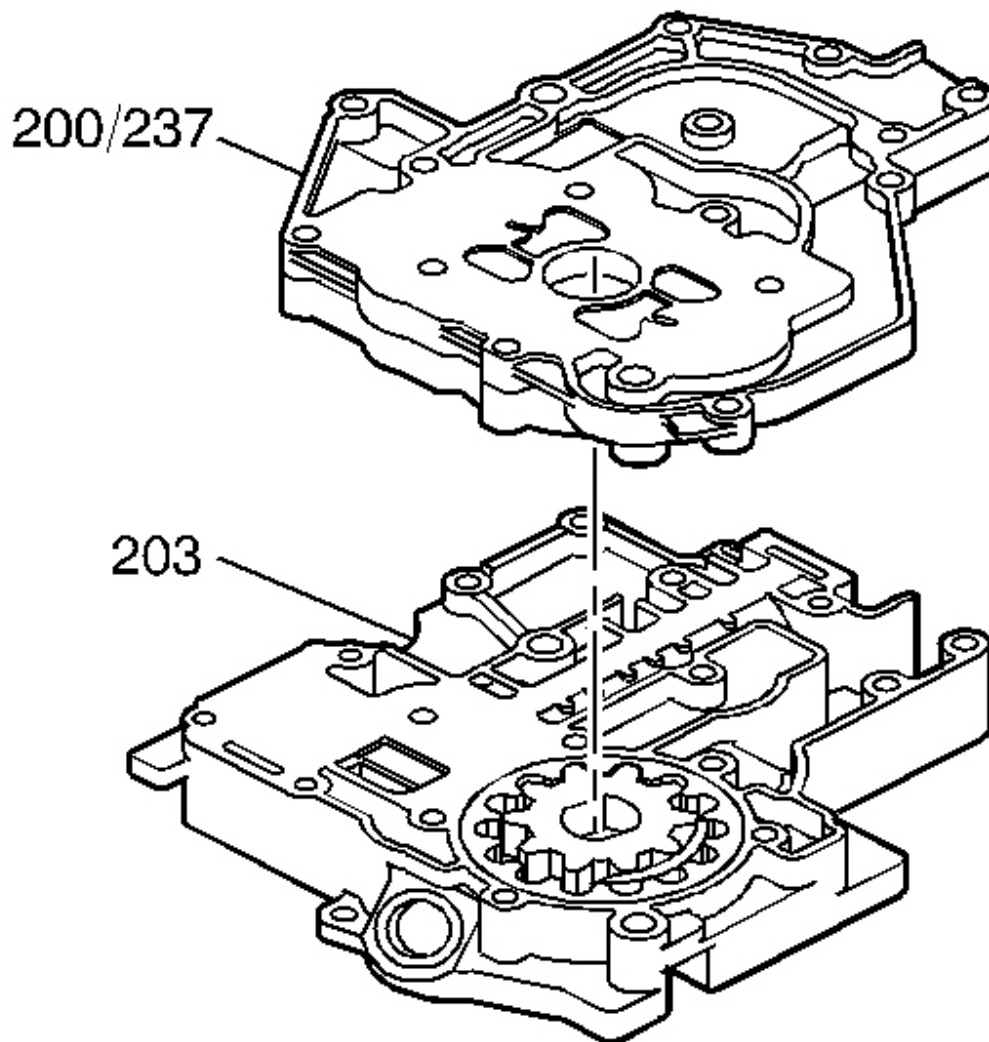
View Of Scavenge Pump Cover, Primary Body Assembly & Secondary Pump Body
